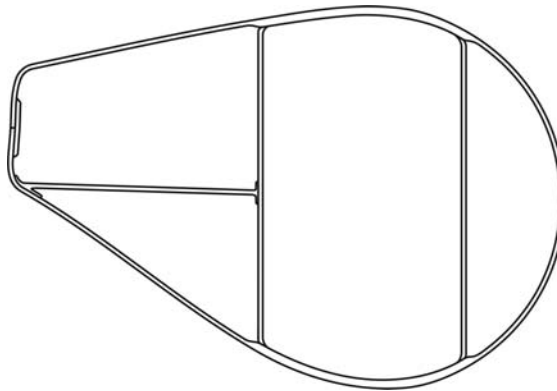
Floor reinforcement in the 'root' section. 3m section shown, but the floor should at least have an extension to 6m where the span of the chord is biggest. For larger blades the floor should have a still larger extent.
